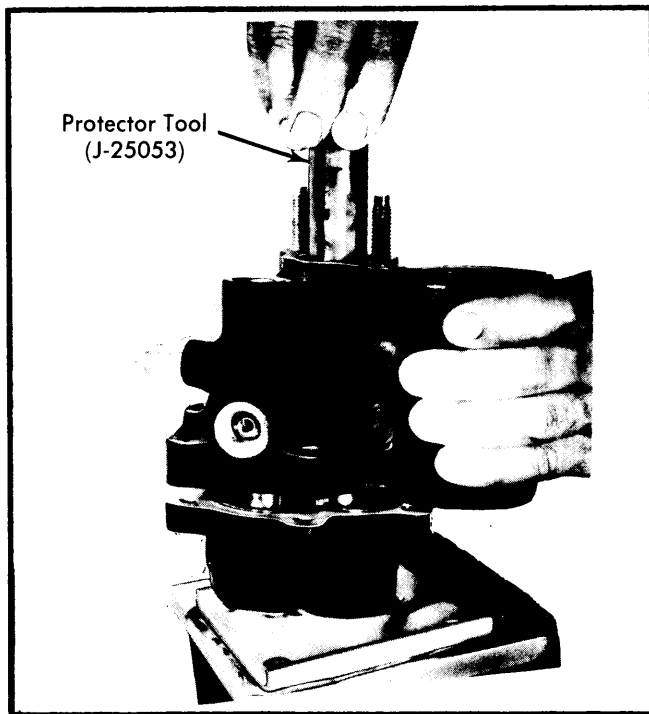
Installing Seal Protector Tool Through Front Housing (Cadillac Shown)
